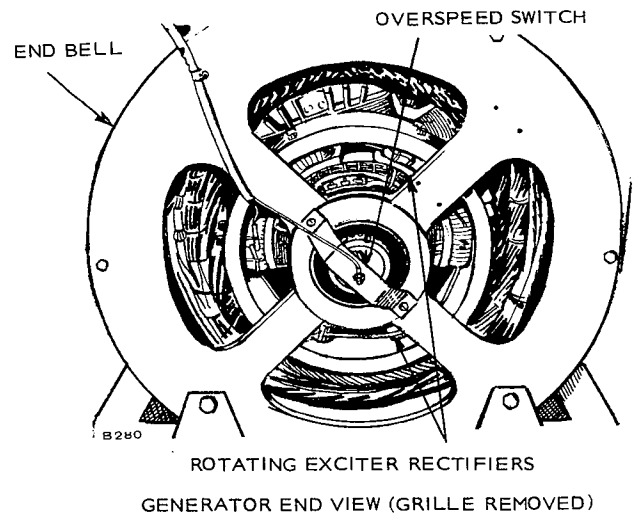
ROTATING RECTIFIER ASSEMBLY
